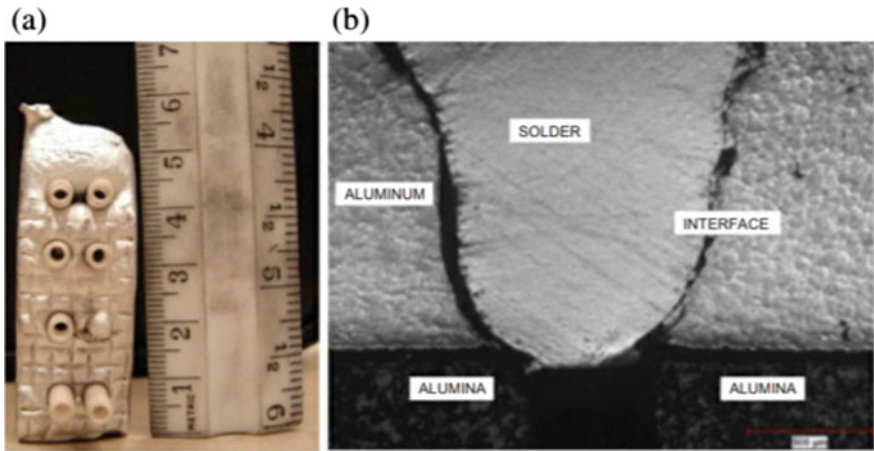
a Aluminium host matrix with embedded Al_2O_3 tubes (before filling the solder). b Solder filling up of the crack by solder. A high porosity exists between the two interfaces [18]
